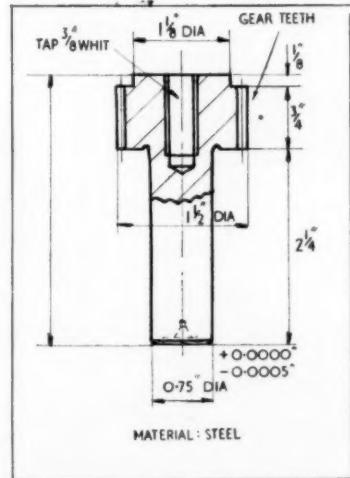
An apparently simple-looking spur gear which had been designed for cheap production but which presented a problem when machining the teeth
